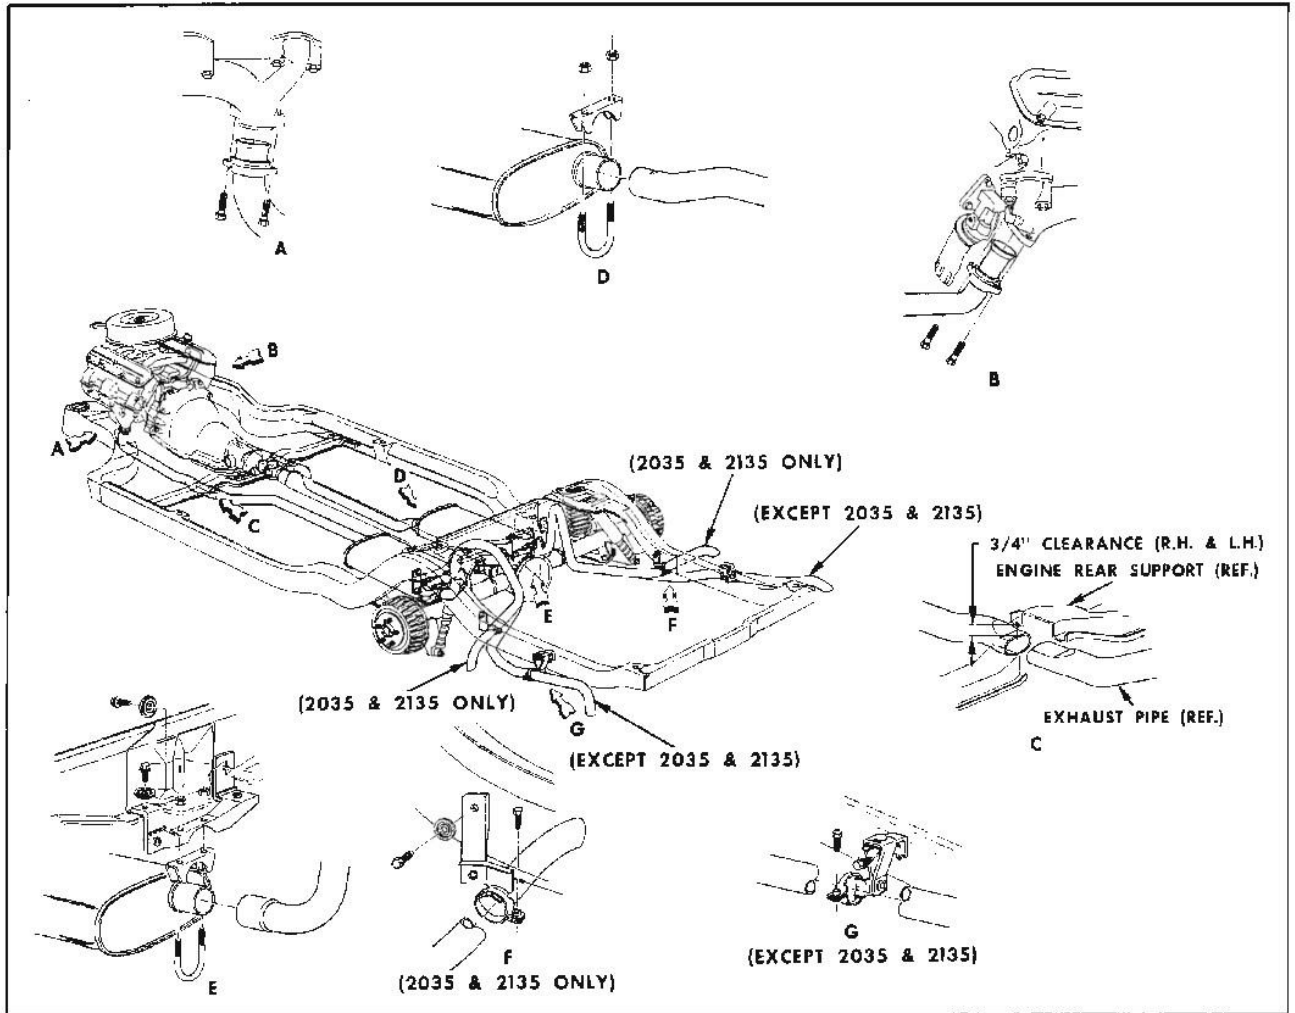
Exhaust System - Eight Cylinder Engine, Dual Exhaust
